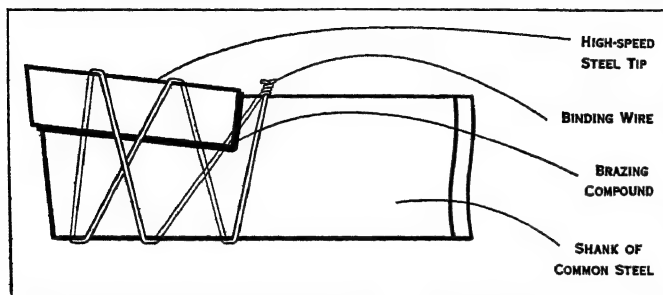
BRAZING A HIGH-SPEED STEEL TIP ON TO A LATHE TOOL
